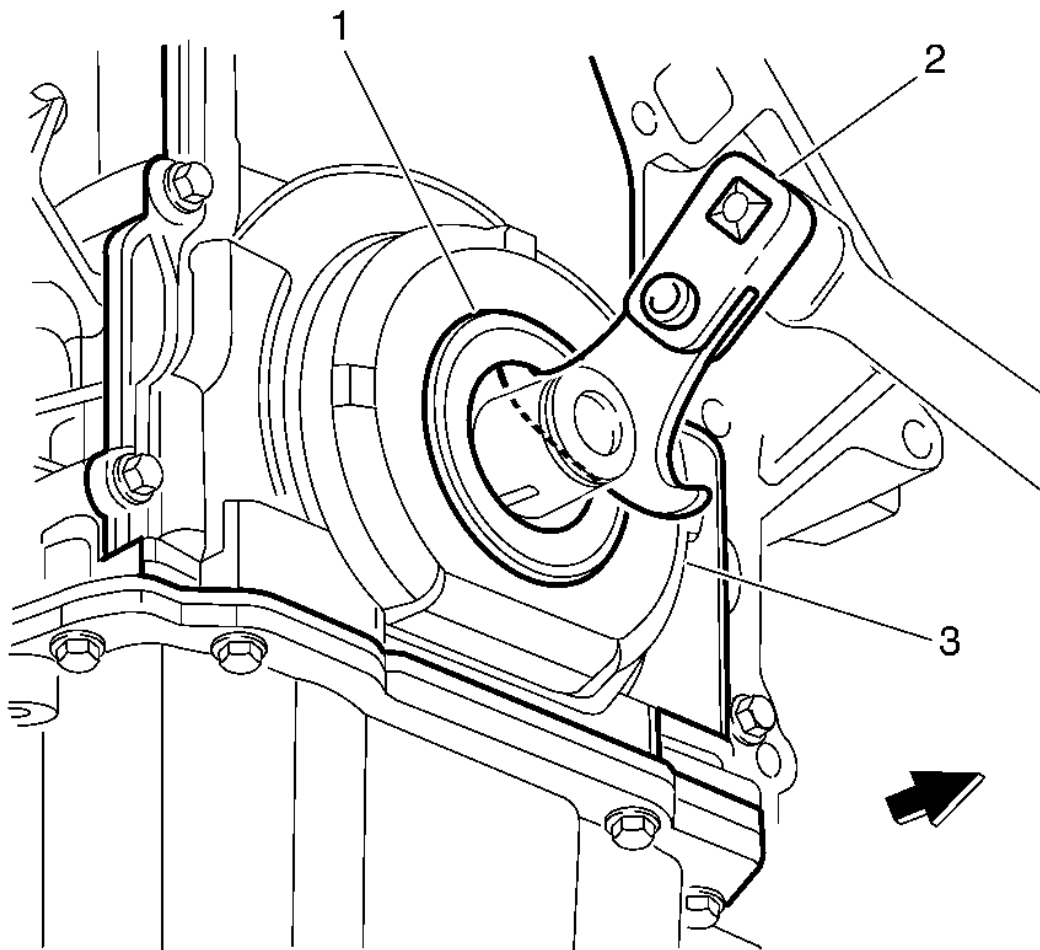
Locating Front Engine Cover, E-308 & Crankshaft Oil Seal
